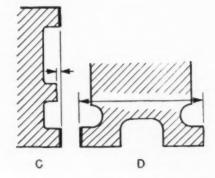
C. This operation is functionally identical to the example in fig. 2B. However, if it is assumed that the figure represents a section of a large workpiece, a check measurement is somewhat more difficult to make. Ordinarily, such a measurement requires a straight-edge long enough to span distance between the upper and lower finished faces. The measurement is then made with calipers or an inside micrometer from the straight-edge to the surface being machined.
